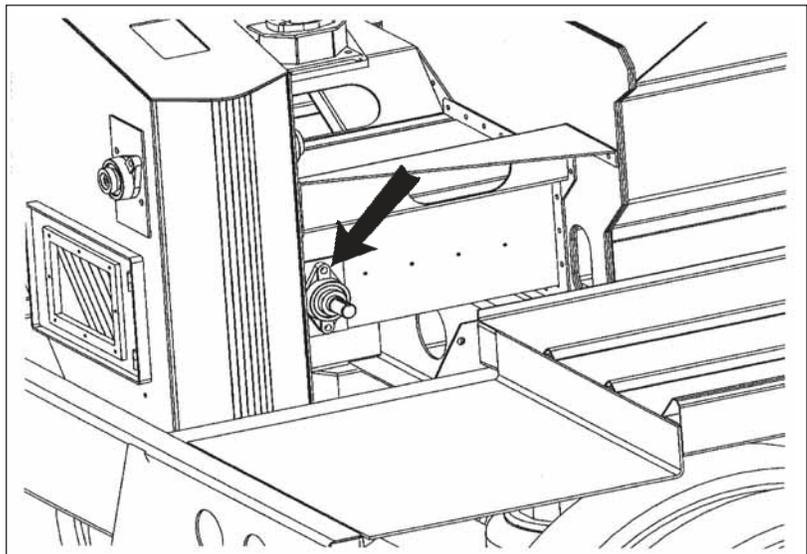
TROUGH PADDLE BEARINGS REAR
